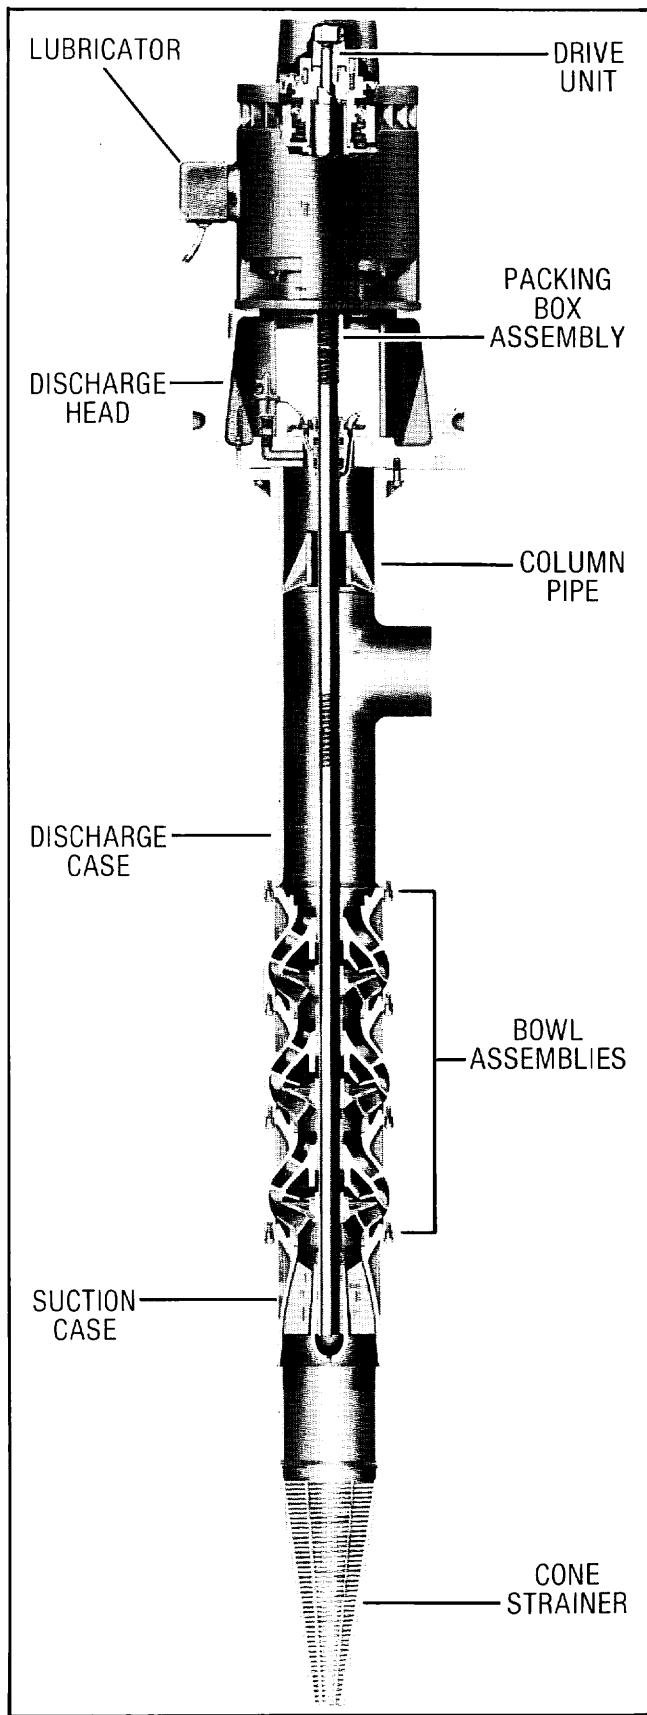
Deep Well Turbine Pump - Open Lineshaft Configuration
